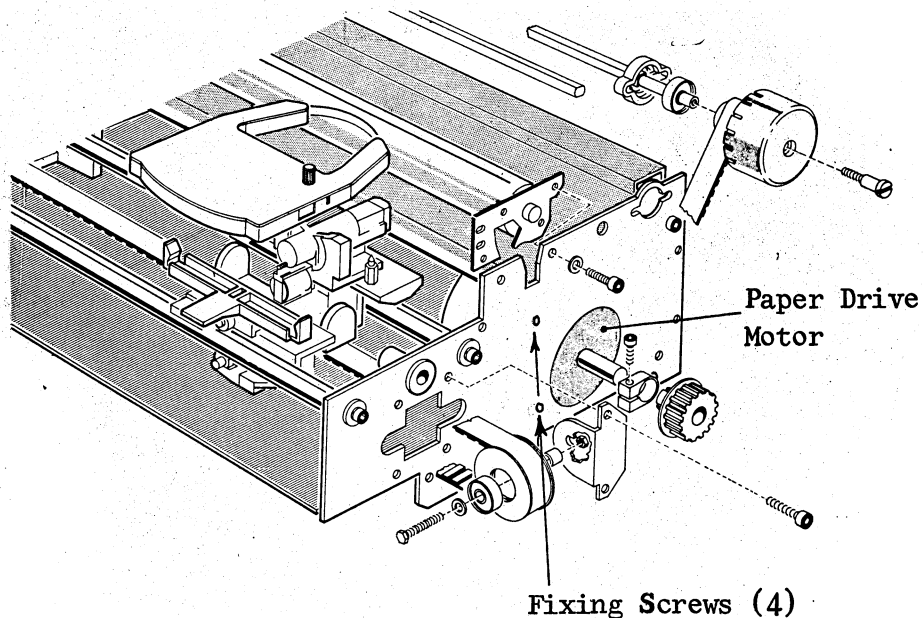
Paper Drive Motor Localization for the Mina Mechanics
